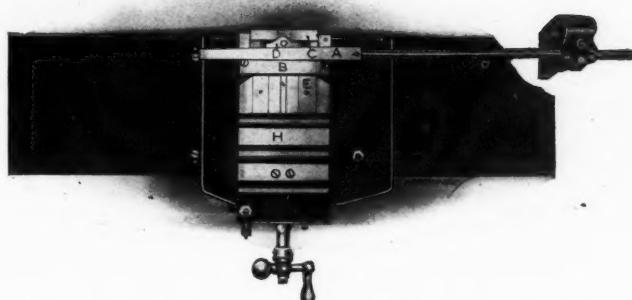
Taper Attachment for Porter-Cable Manufacturing Lathe
